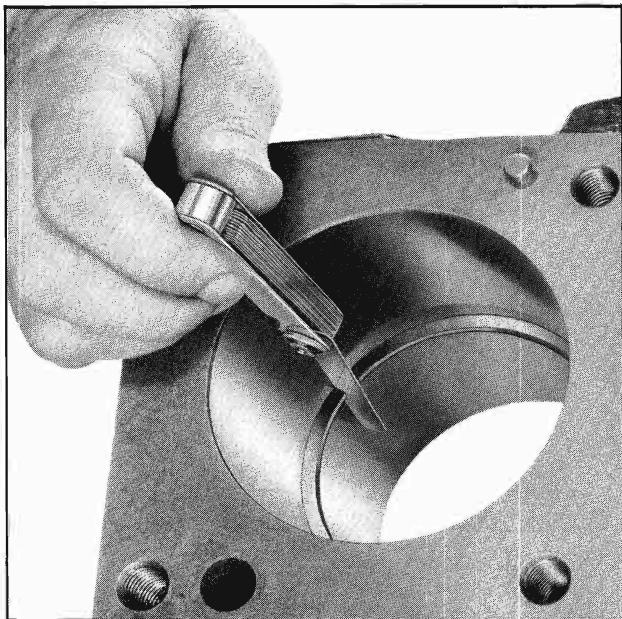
Checking Ring Gap with Feeler Gauge
